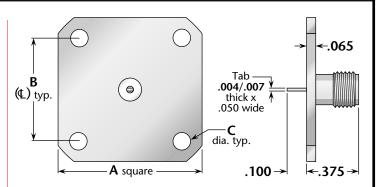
(1" square flange, interchangeable with type N standard flange size)
